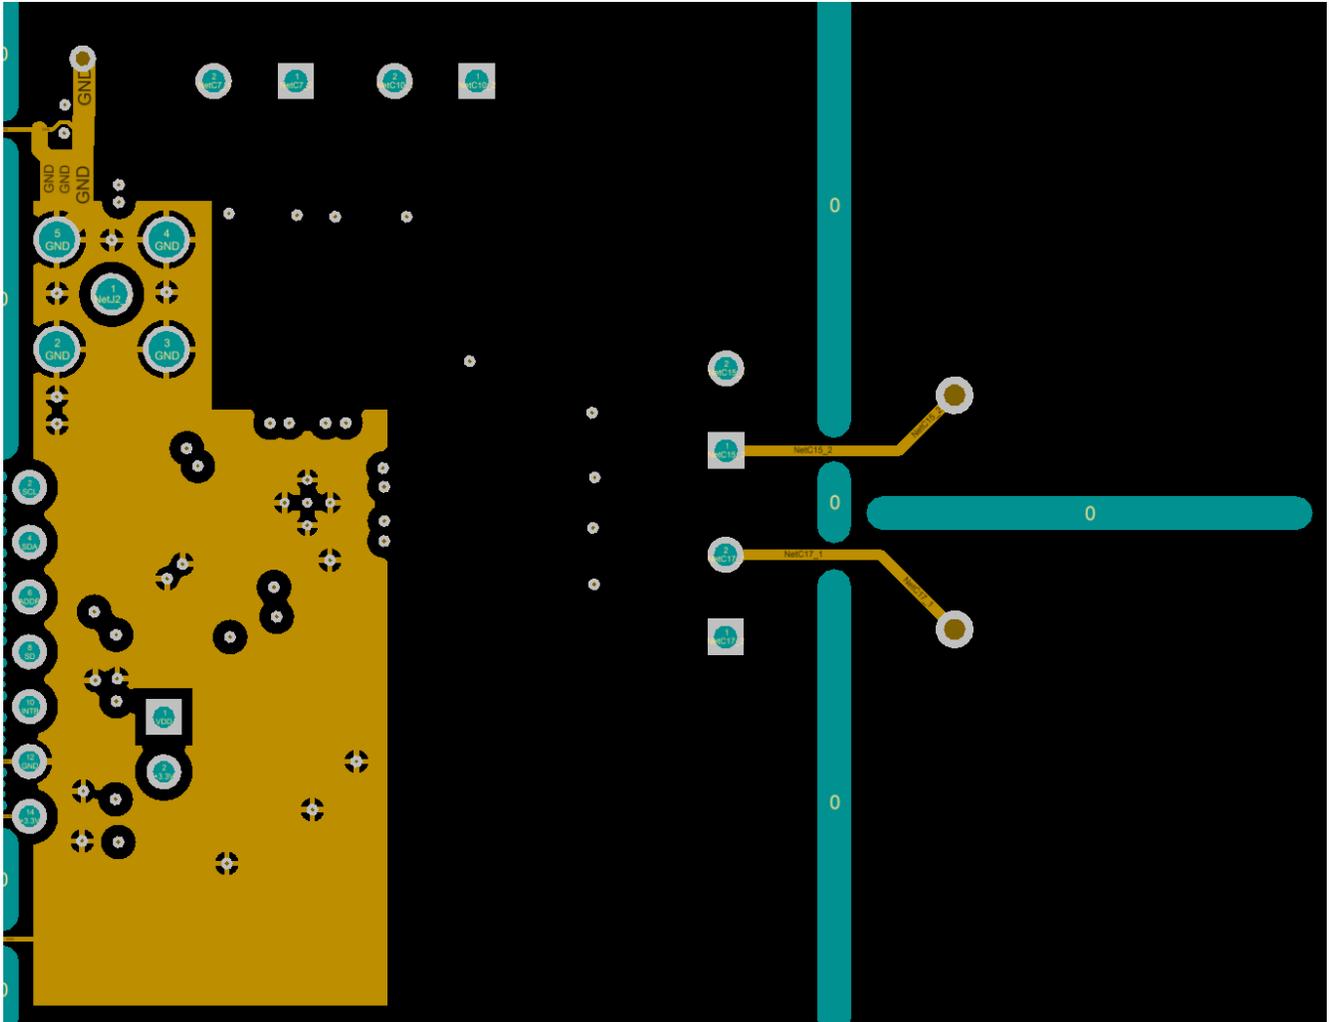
Example PCB Layout: Mid-Layer 1 (GND)
